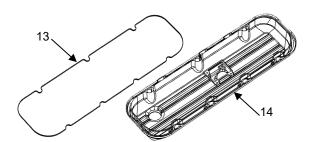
Install Valve Cover Gasket (13) in Valve Cover (14) groove.
